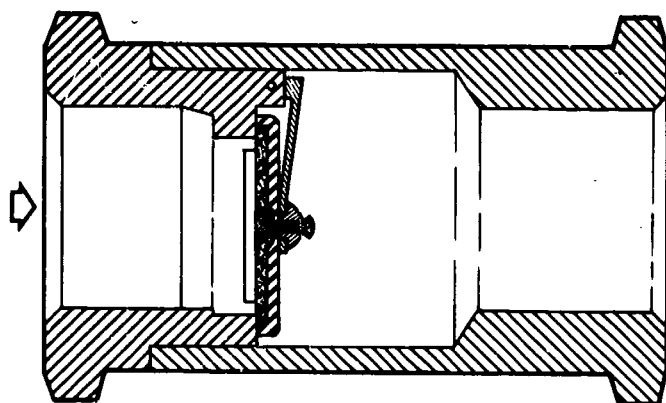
Swing Check Valve Incorporating a Soft Seal
